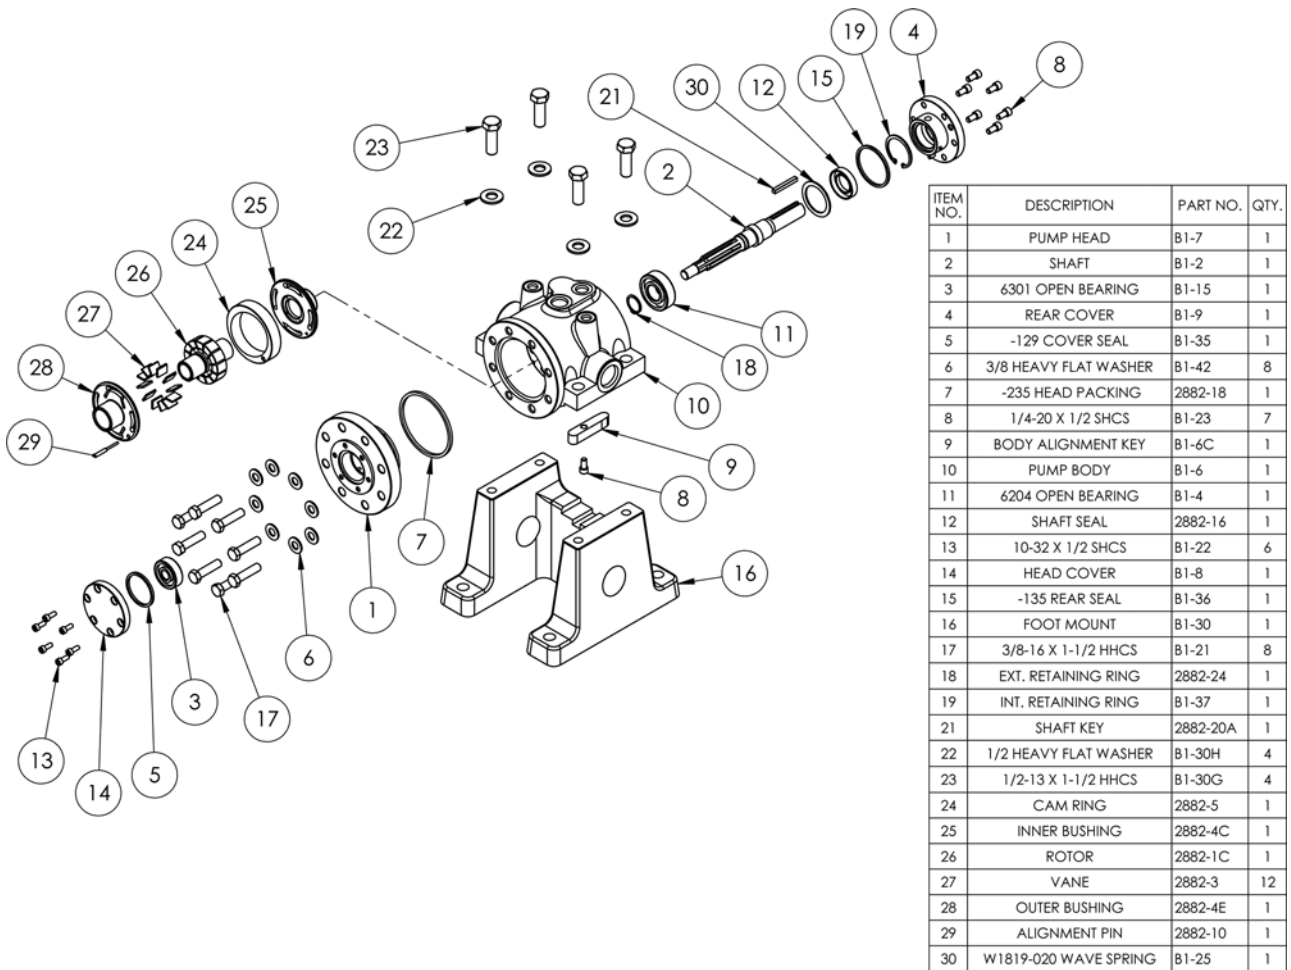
Conestoga USA, Inc., B1 Pump Assembly
